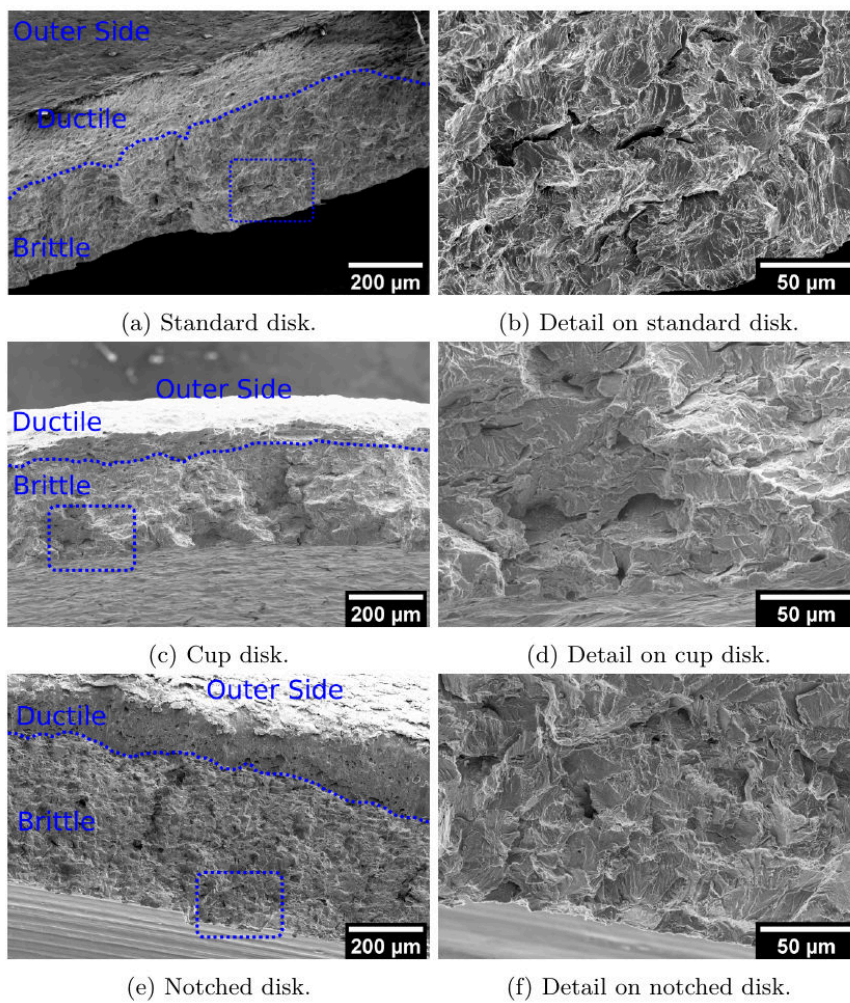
Surface fractures of X52 steel disk specimens tested under hydrogen.
